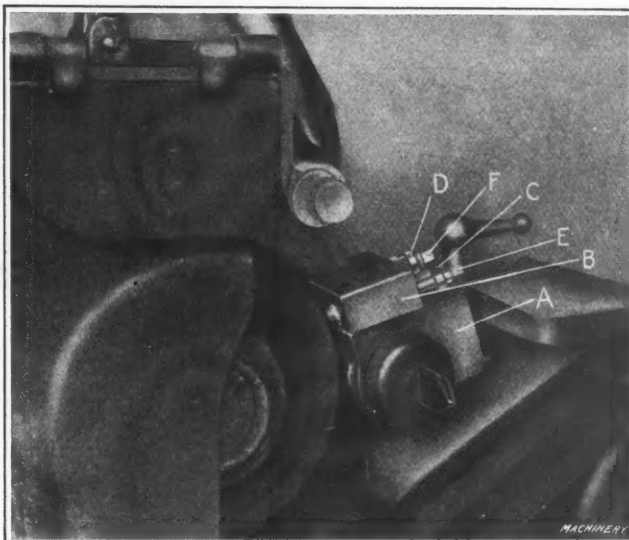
Multiple Diameter Wheel Truing Device for Use on Brown & Sharpe Plain Grinding Machines
